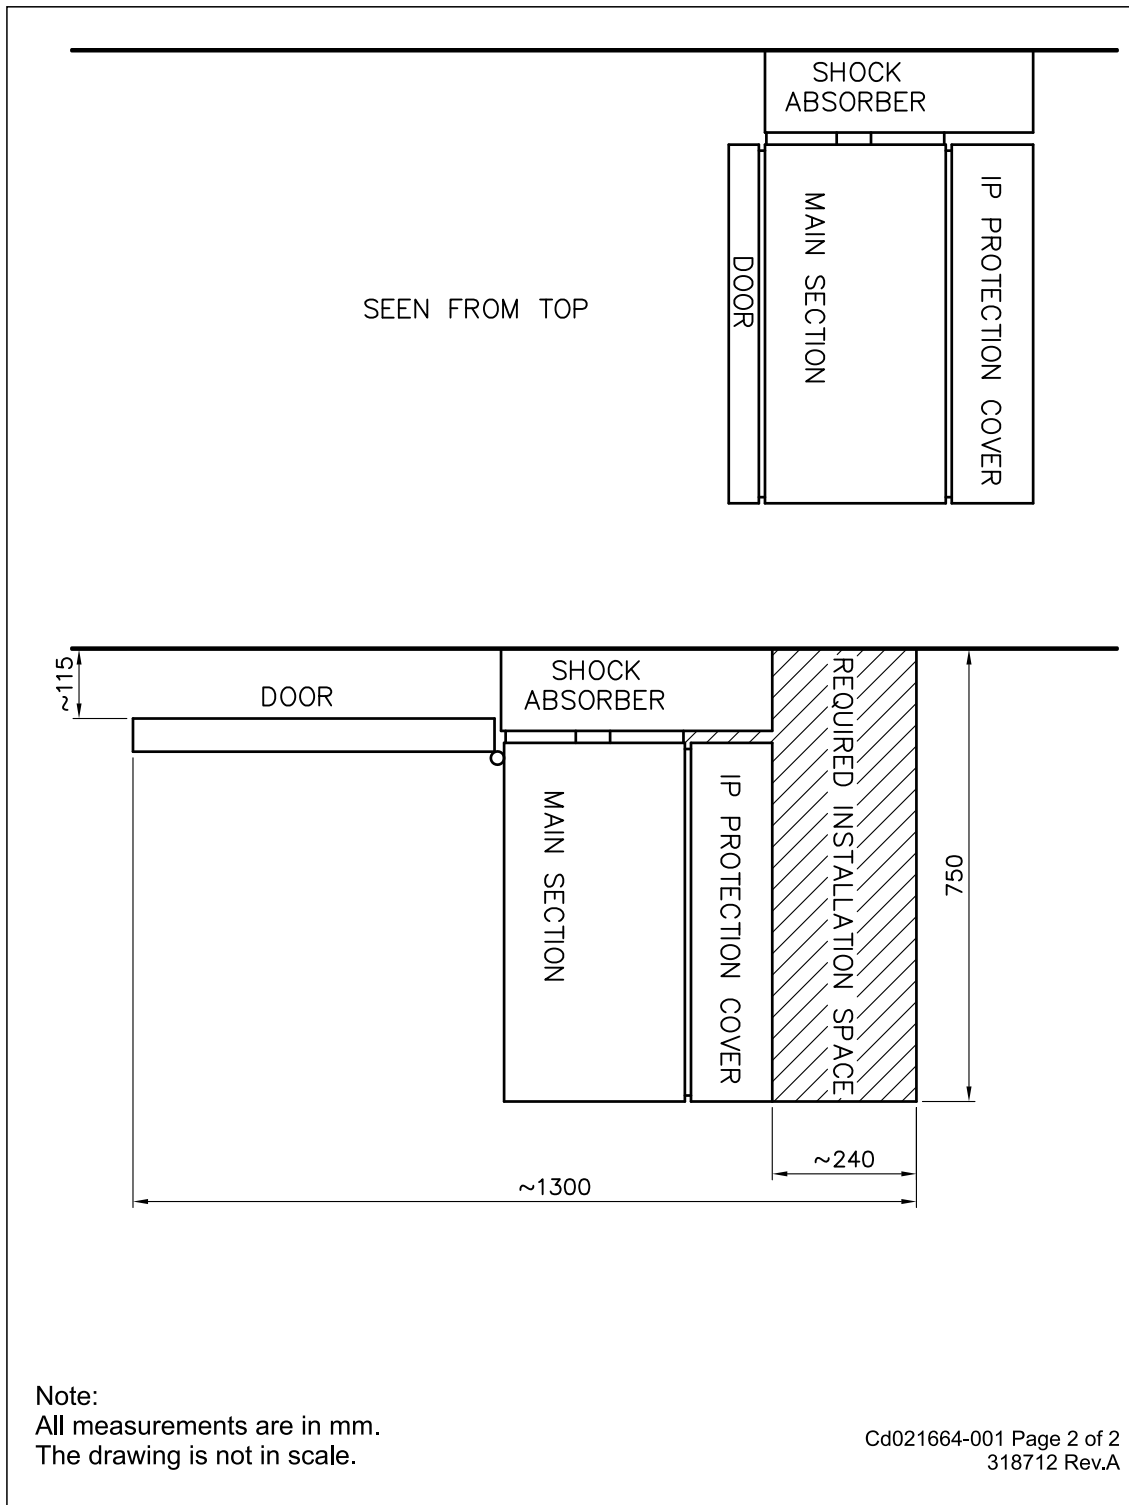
Transceiver Unit 2° x 2° system – Outline dimensions sheet 2
